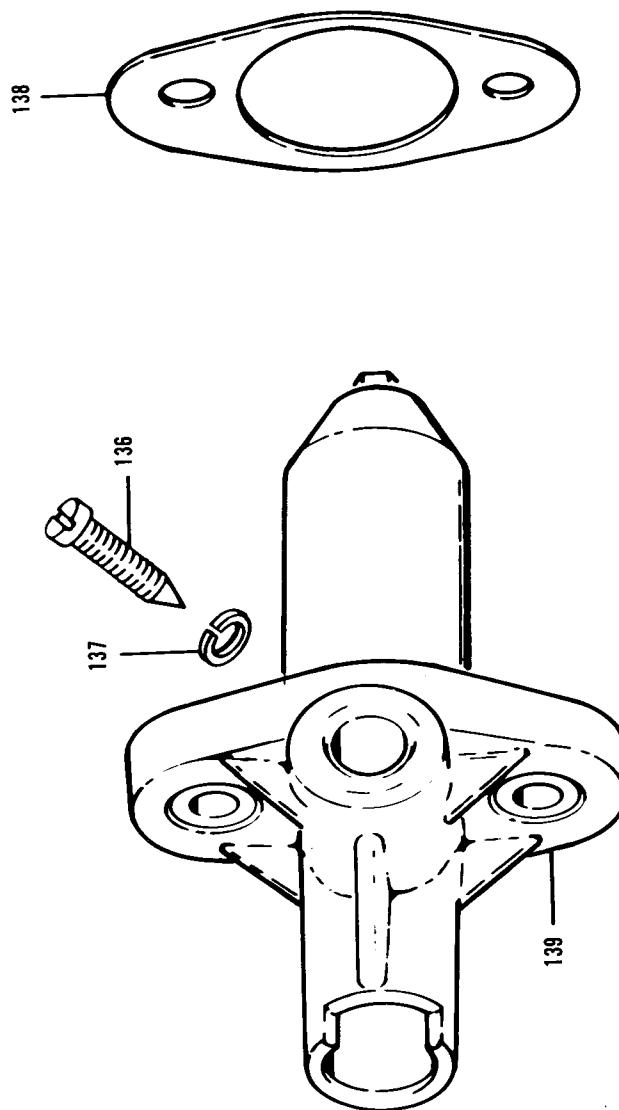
Magneto, Ignition (Conductor Assembly Booster) (Sheet 8 of 10)
